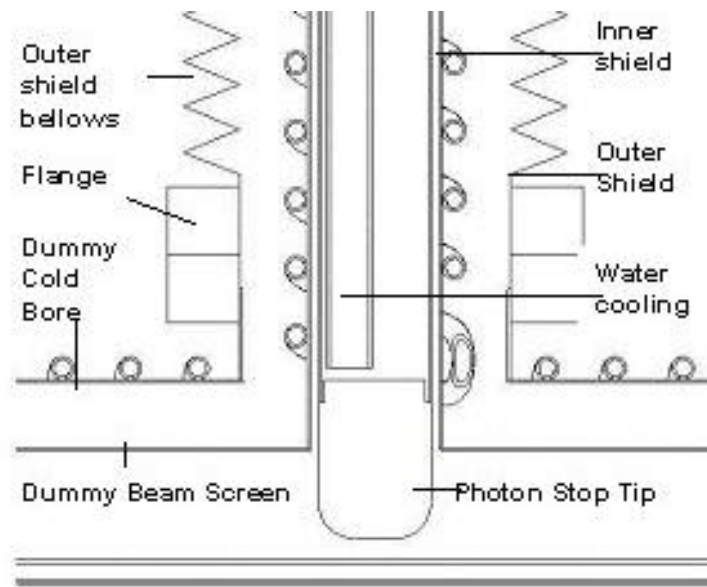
Cross-section through photon stop cryo-test assembly, detail.
